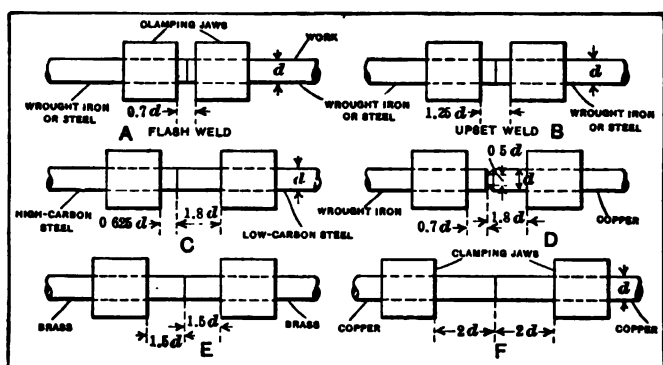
Diagram showing Projection of Work from Clamping Jaws for Welding Different Kinds of Material and for Making Various Types of Welds
